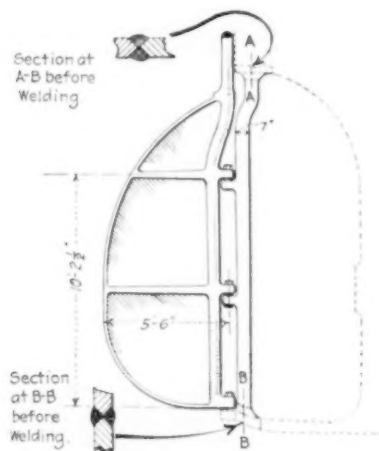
RUDDER POST REPAIRED BY WELDING
